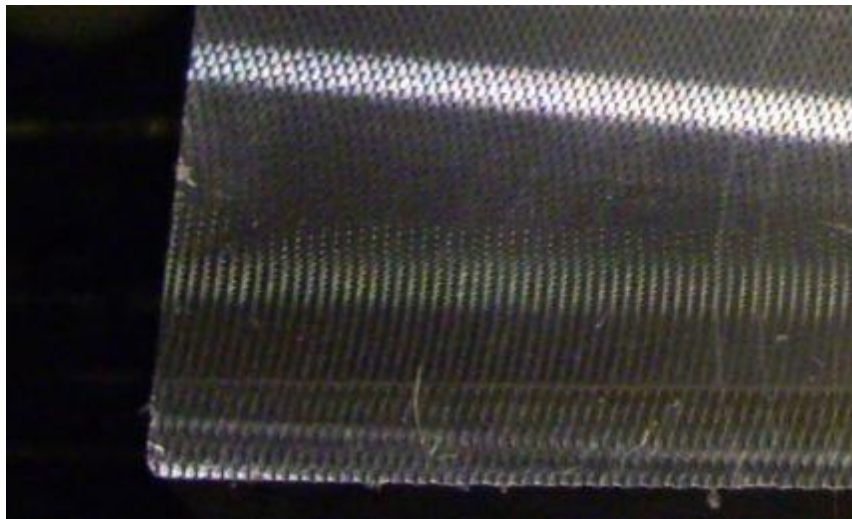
Surface roughness of aluminum after milling by end mill with replaceable polyhedral plates
